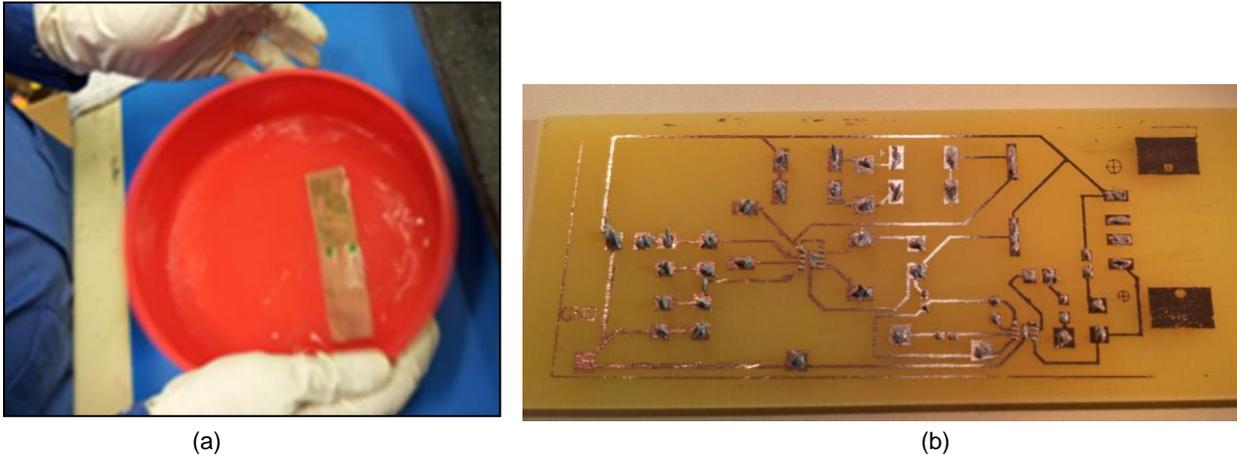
(a) Etching the board "at home". (b) Bare PCB with solder paste.
